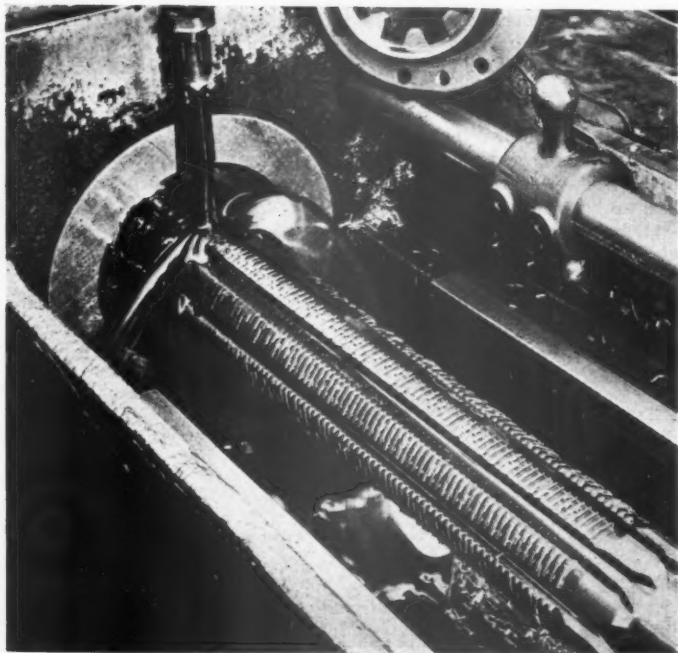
Nicked Broach Measuring. (Courtesy of Messrs. Kirkstall Forge & Engineering Co. Ltd.)
